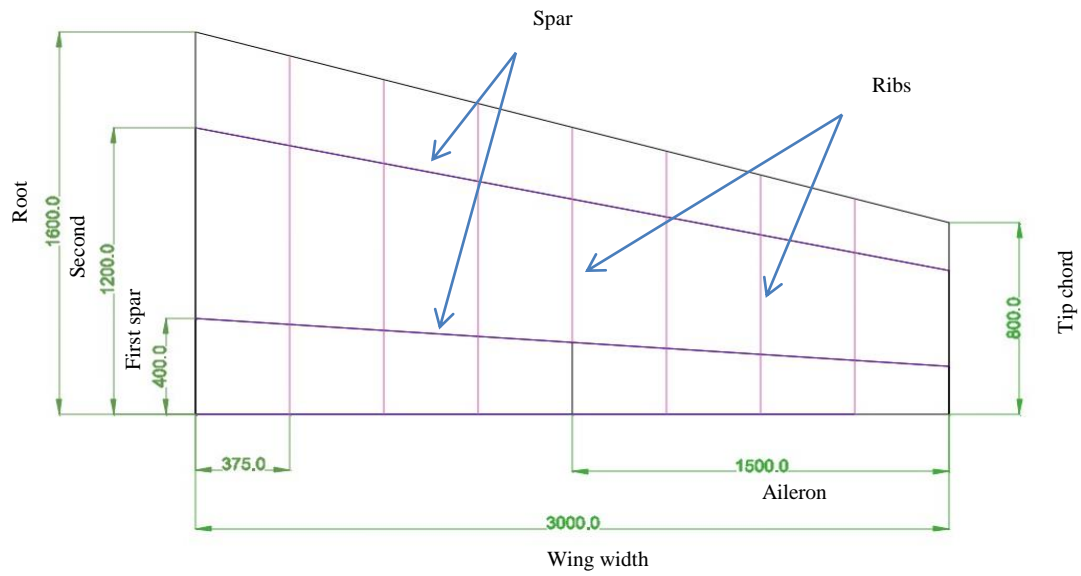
Wing sketch (all dimensions in mm, drawn in AutoCAD software).
